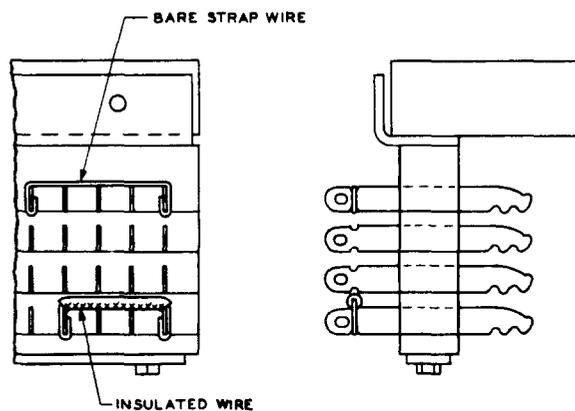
Straps on Local Cable Side of Terminal Strips – Terminals With Hole and Notch
